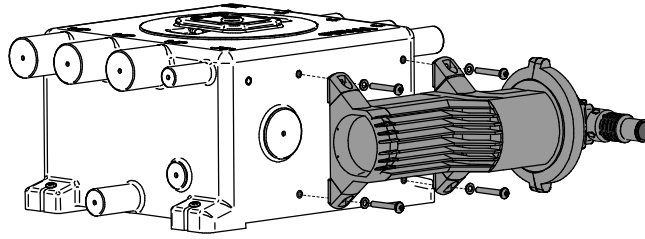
Attaching Gulper 220 to the Grey Waste Tank
